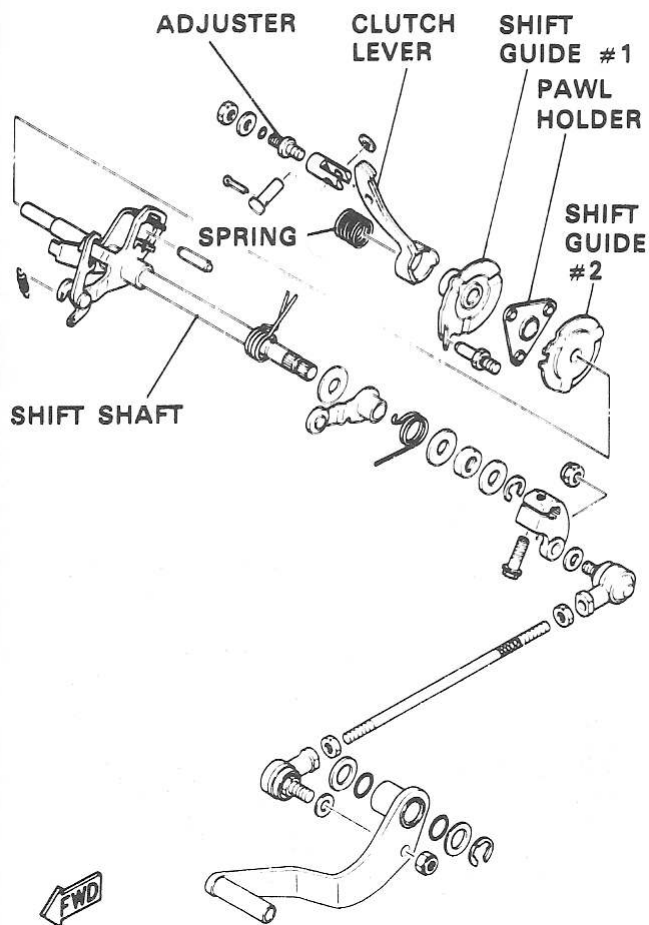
B.32 Gearshift and clutch release mechanism components — exploded view (Sec 19)
